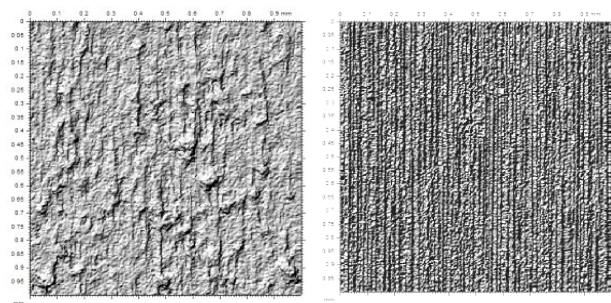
2D surface cutout, grinded material PP -left and steel 1.0060 (E335) -right, grinding wheel A99 60J 12V
